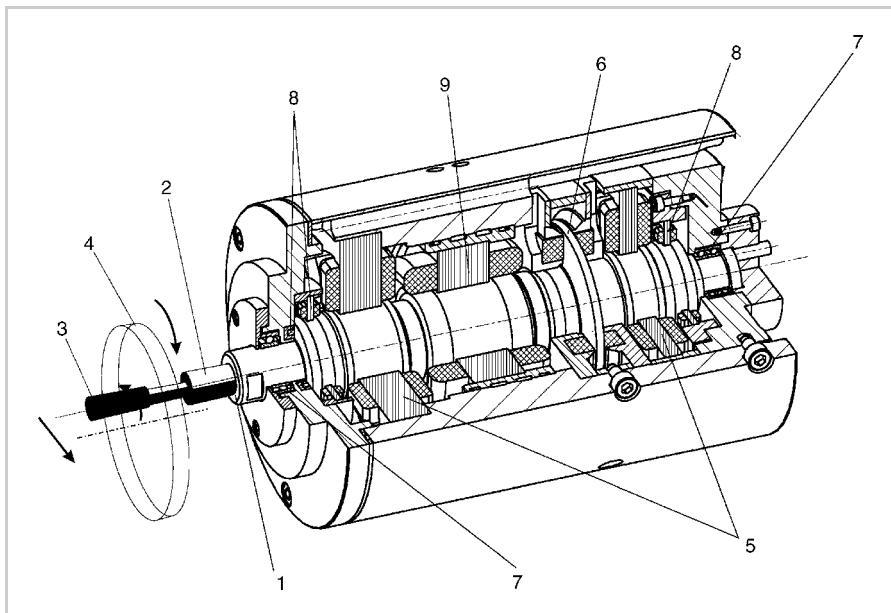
Grinding drive unit with electromagnetic radial and axial bearings. 1 grinding shaft, 2 tool, 3 grinding cylinder, 4 tools, 5 radial magnetic bearing, 6 axial magnetic bearing, 7 auxiliary bearing, 8 displacement sensors, 9 drive motor
